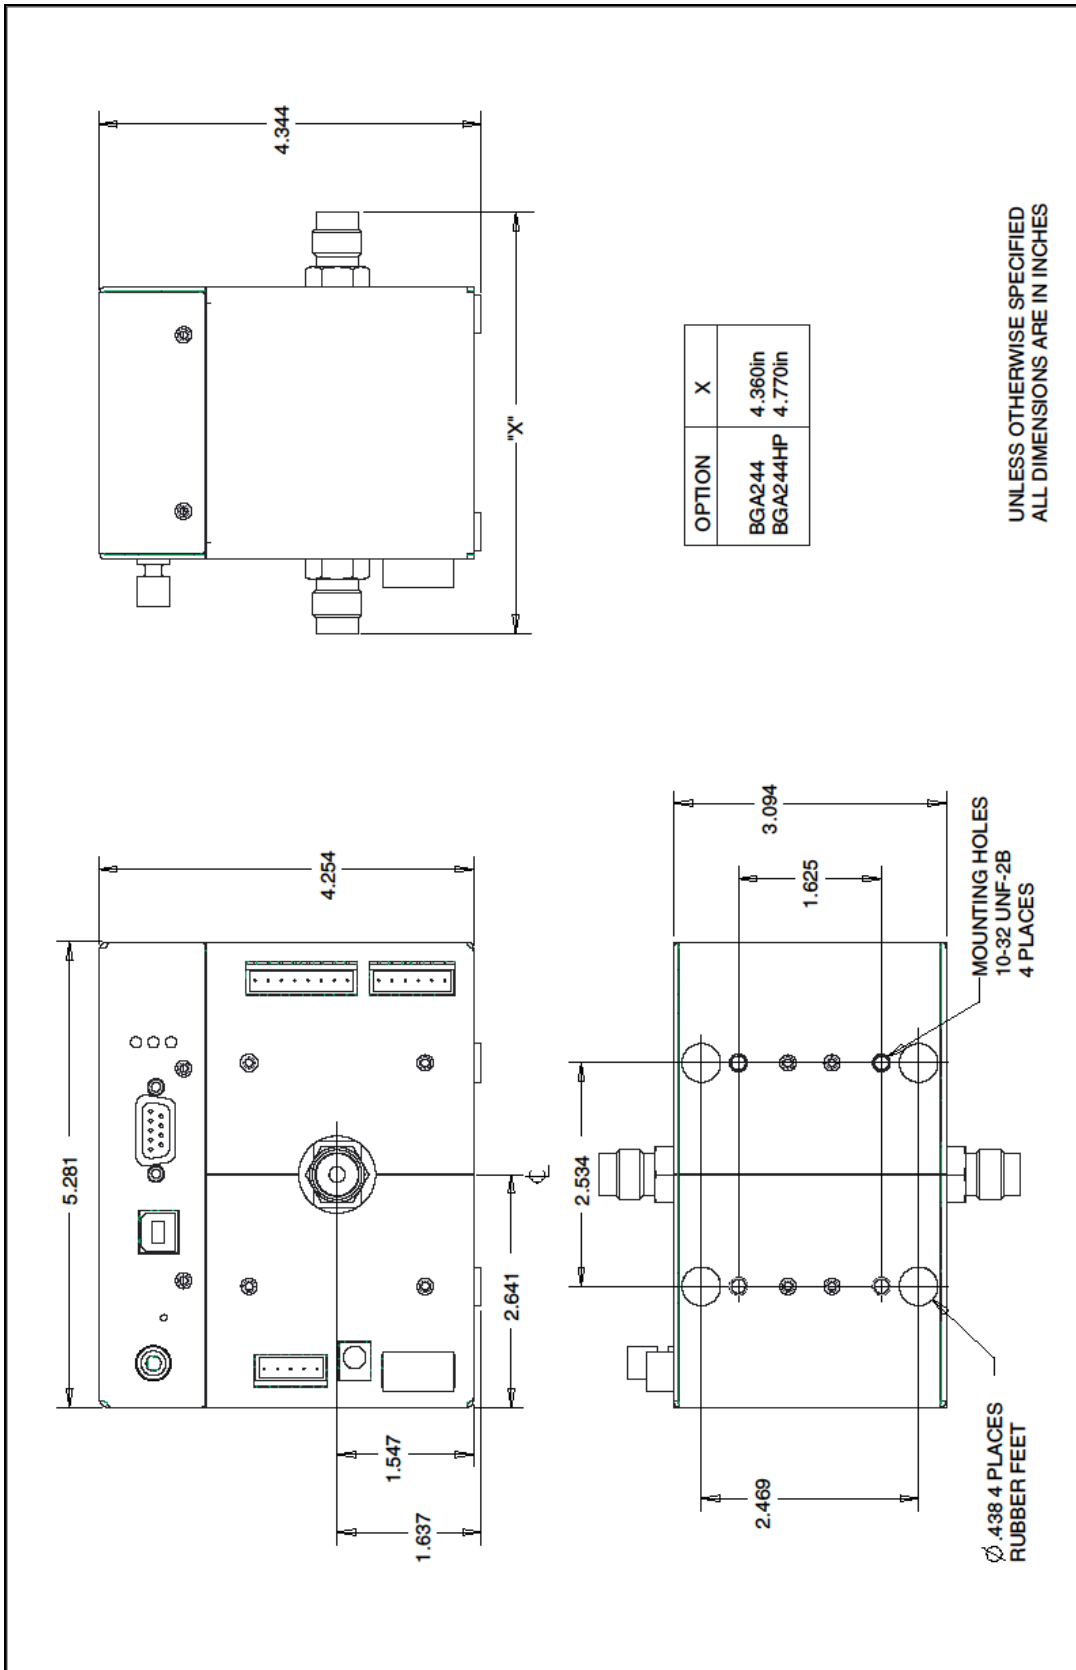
GPA-2000 MECHANICAL DRAWING
